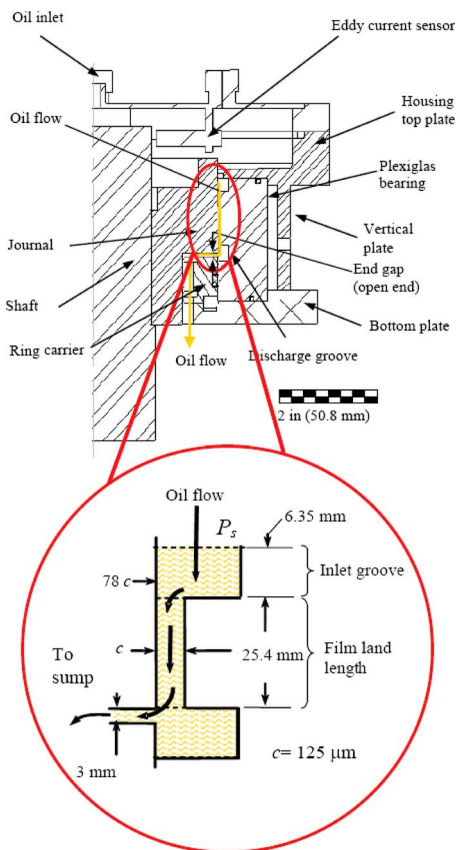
Cut view of open-end SFD and detail view of squeeze film land
